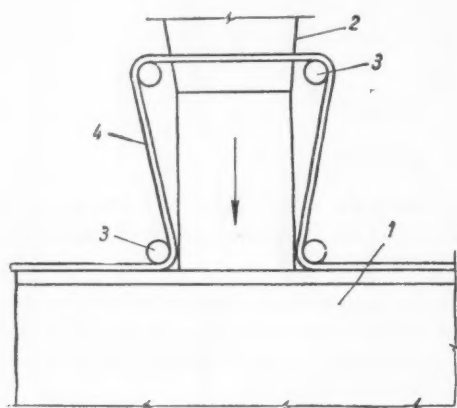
Sealing loading opening of bin: 1) bin; 2) spout of discharge trolley; 3) rollers; 4) belt.
